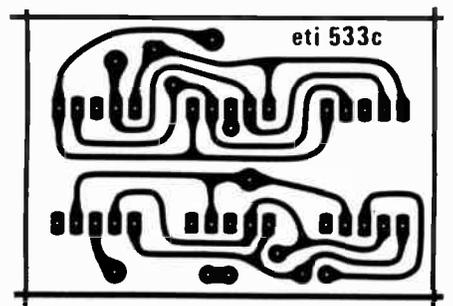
Printed circuit layout of the d:display board. Full size 53mm x 36mm.
